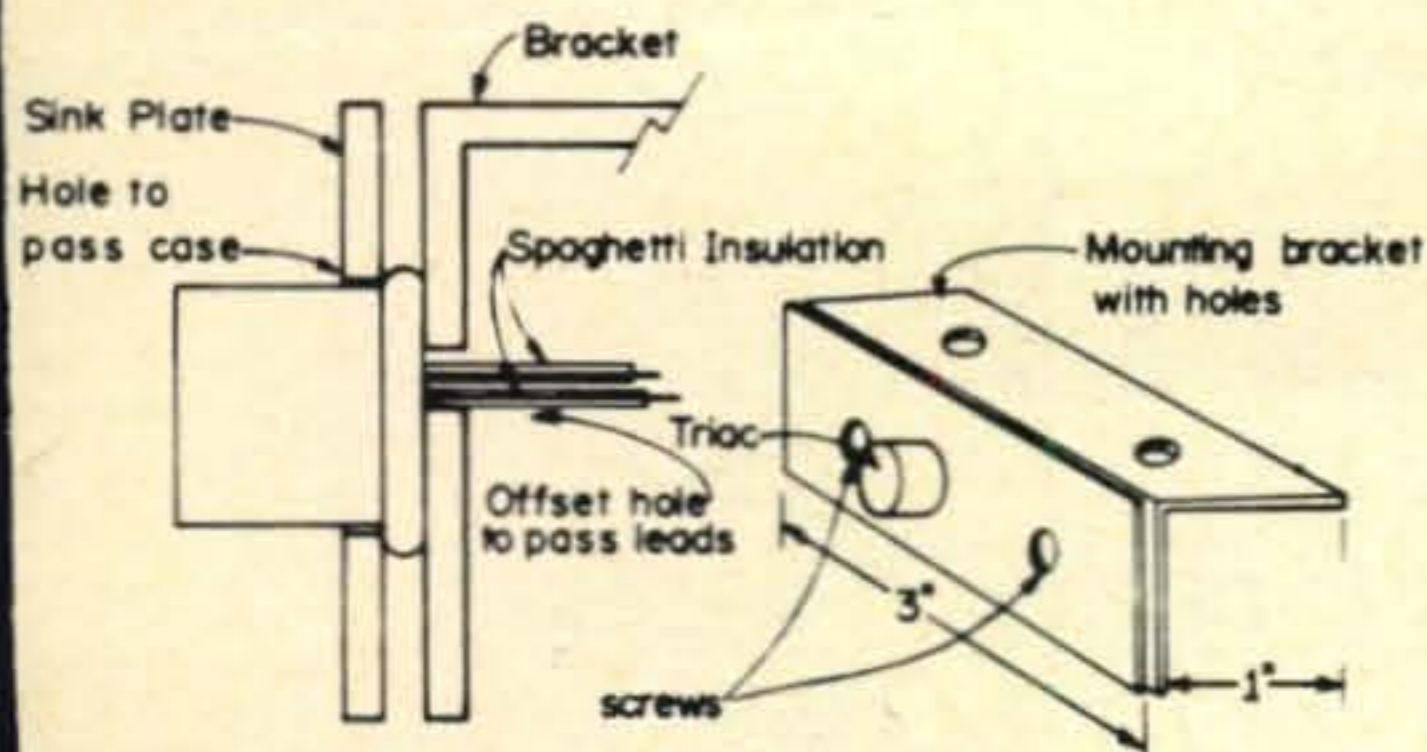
Suggested heat sink for the triac used in the circuits of figs. 5 and 6. Aluminum, 1/16" thick, of the dimensions shown above, may be used. The case connects directly to the sink so the sink must be insulated from the chassis or meter case.
